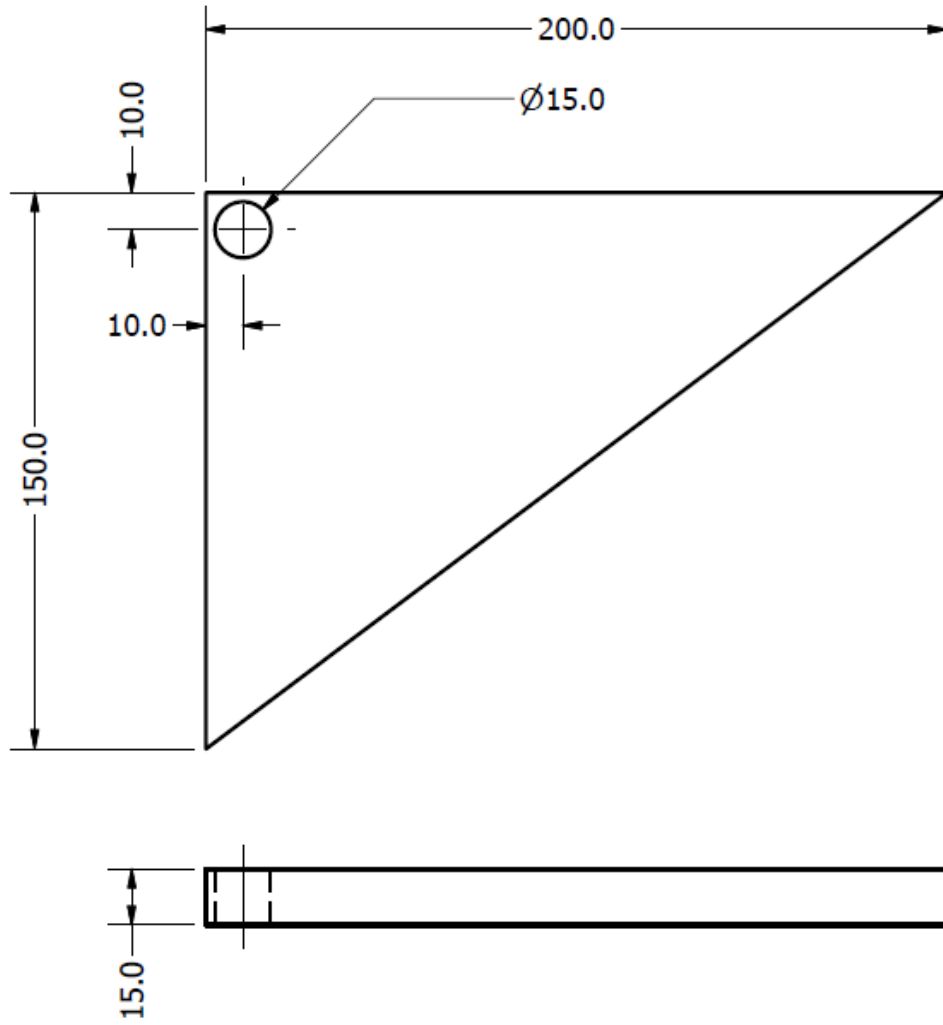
Complete this drawing with datums and the appropriate tolerances.
